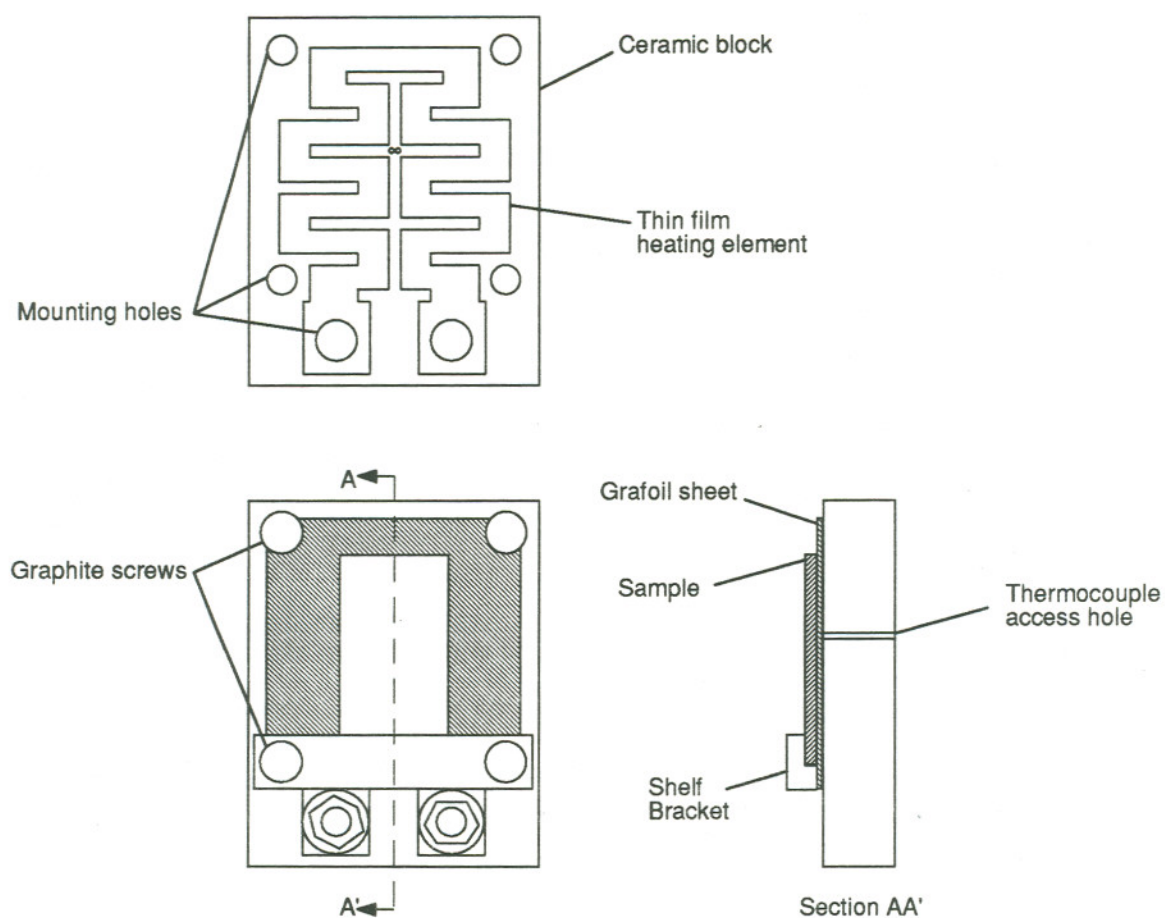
Sample holder and heater assembly. The holder assembly mounts to tantalum rods via the two large mounting holes near the bottom of the ceramic block.
